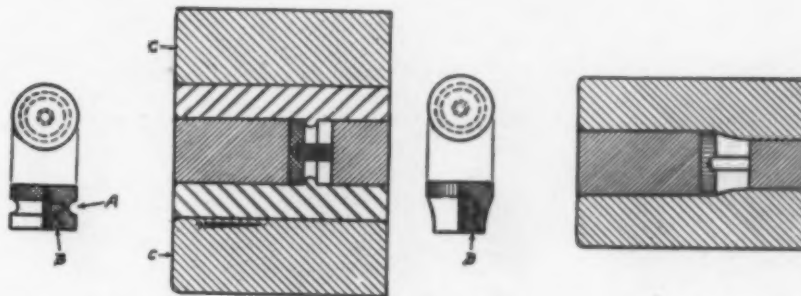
Left, incorrect design for a knurled knob, necessitating the complex mold shown. Right, the correct design with simpler mold.
